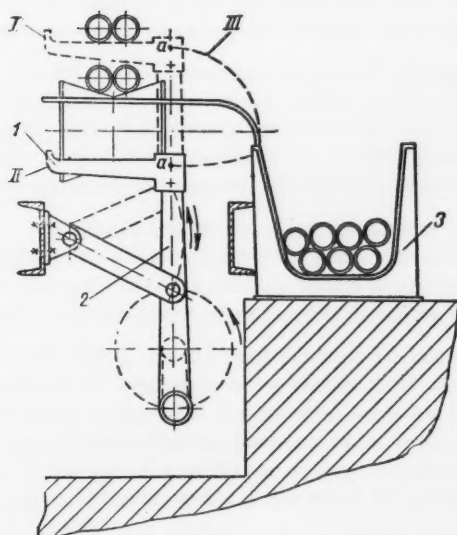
Tube discarder. 1) Lever; 2) guide arm; 3) container.
